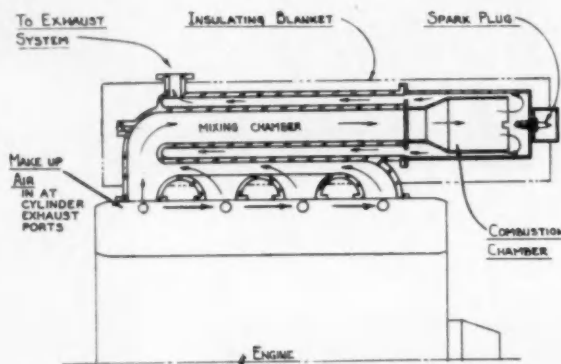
Schematic drawing of TRW exhaust manifold afterburner. Exhaust gases, together with metered make-up air, enter the mixing chamber and sweep into the combustion chamber at the extreme right. Burned gases at elevated temperature leave the combustion chamber through a series of tubes surrounding the mixing chamber.
